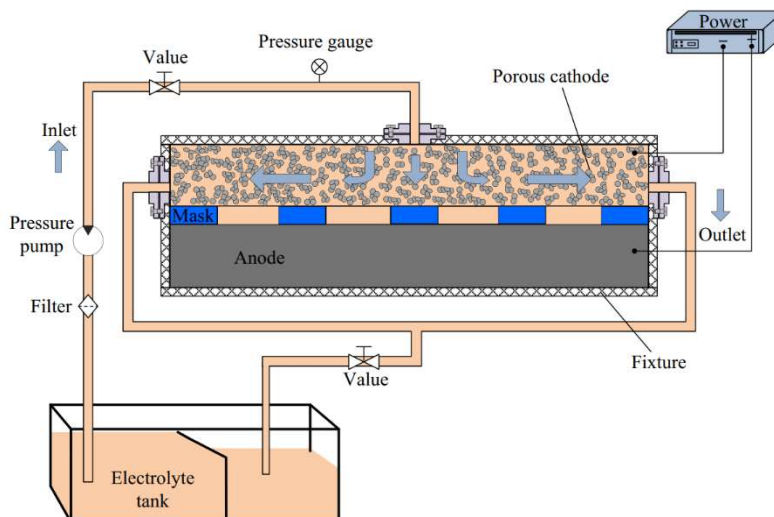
The processing principle of mask micro-electrochemical machining [24]
